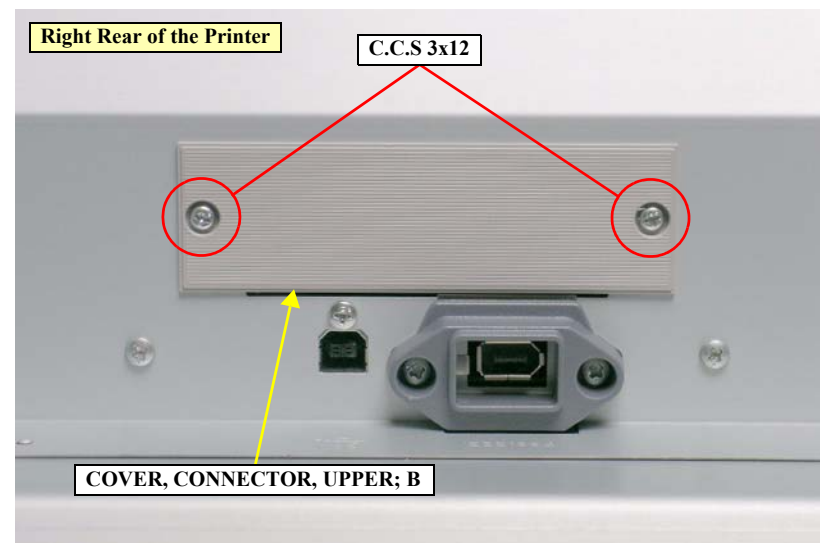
Removing the COVER, CONNECTOR, UPPER; B
